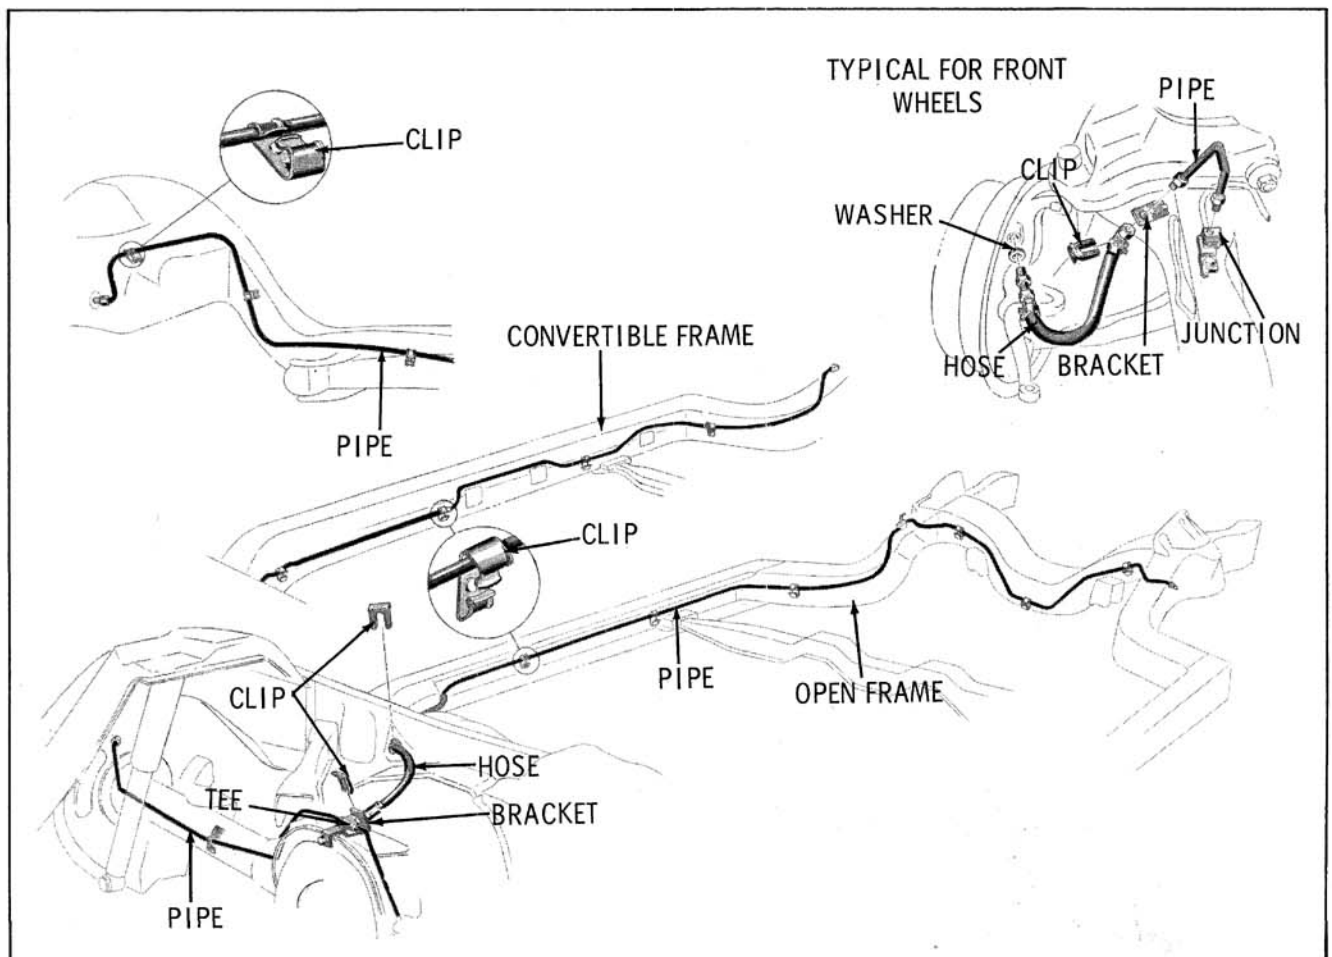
Hydraulic Brake Lines (52 through 86 Series)
